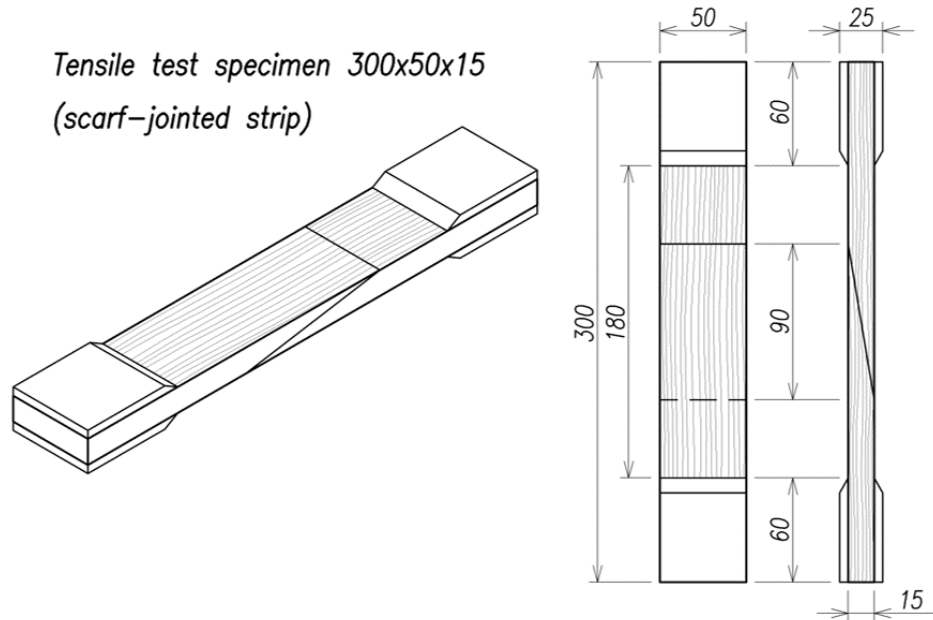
Scarf-jointed specimen geometry and dimensions [8].
